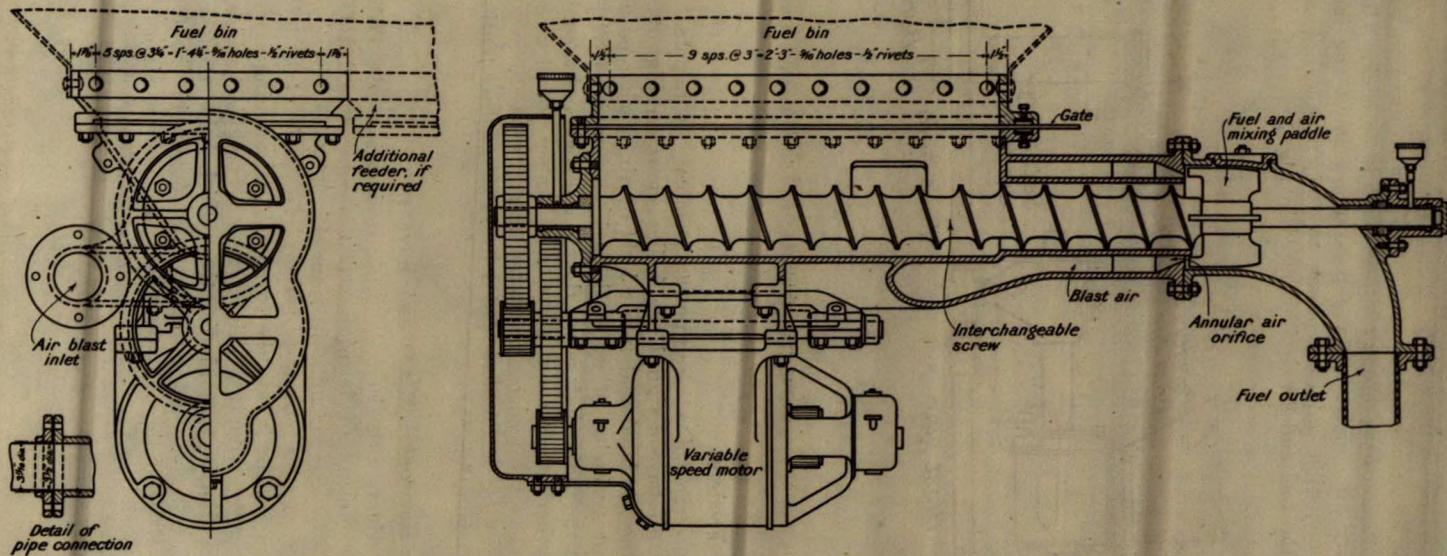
Assembly of type G feeder, Pulverized Fuel Equipment Company.
